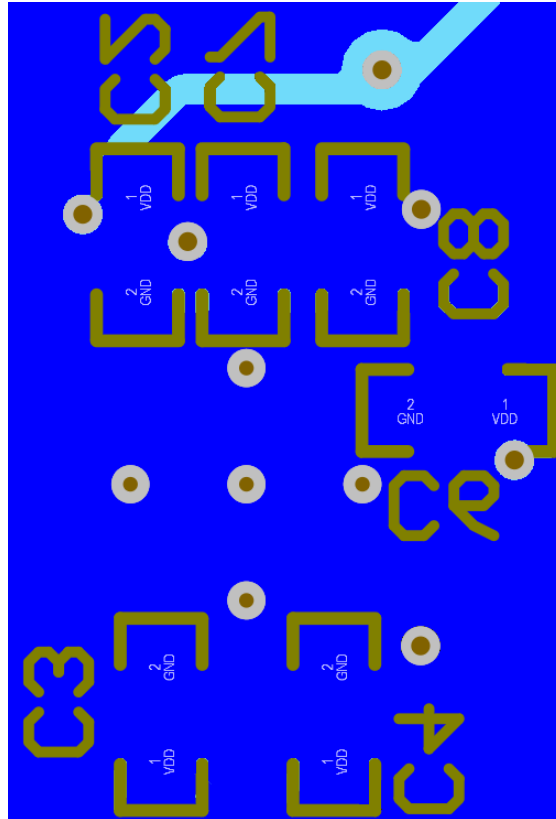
PCB Layout Example for CDCDB400, GND Layer
